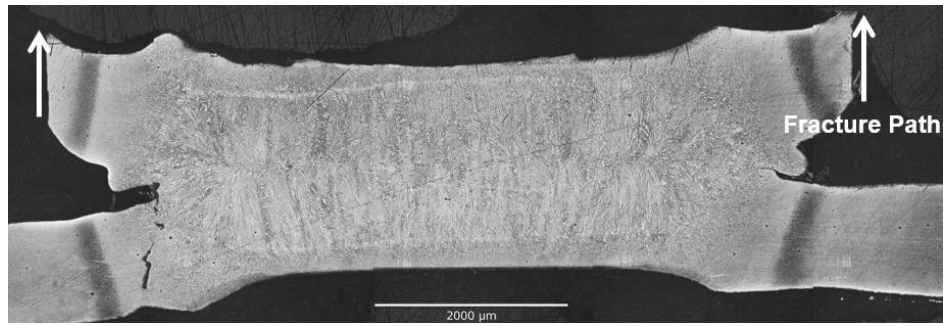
Cross-section of the DP980 weld nugget after CTS test showing the fracture path.
